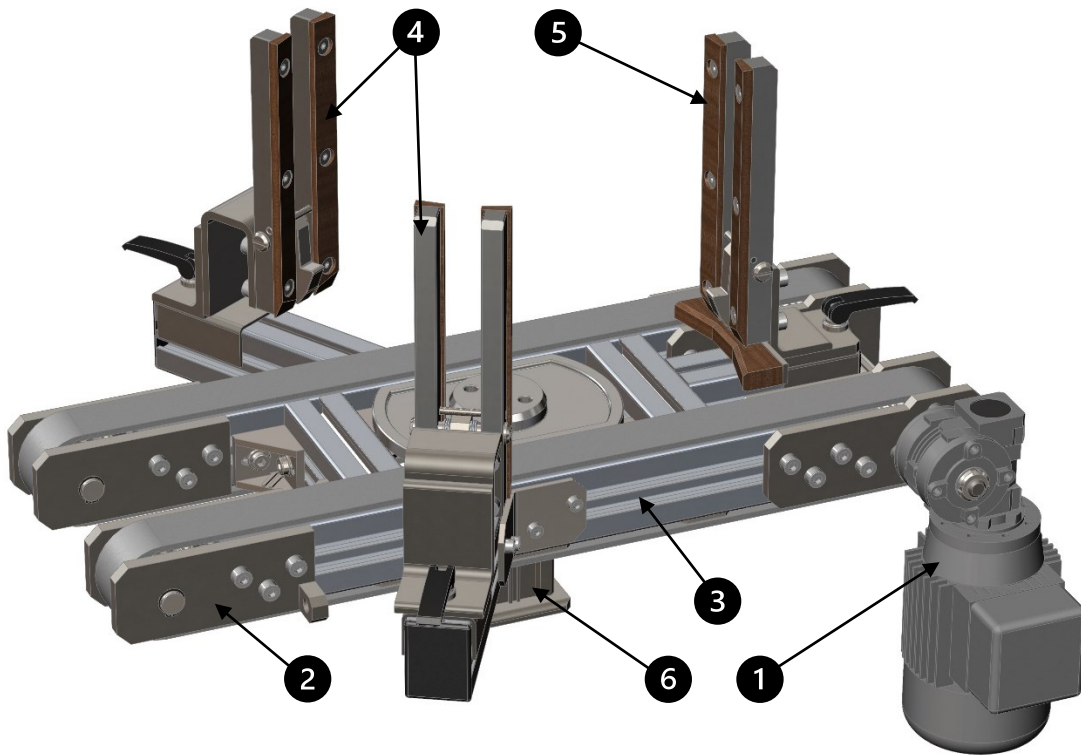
Stacking conveyor. (1) Drive unit. (2) Belt tensioning unit. (3) Frame. (4) Side holders. (5) Front holder. (6) Part lifting mechanism.
